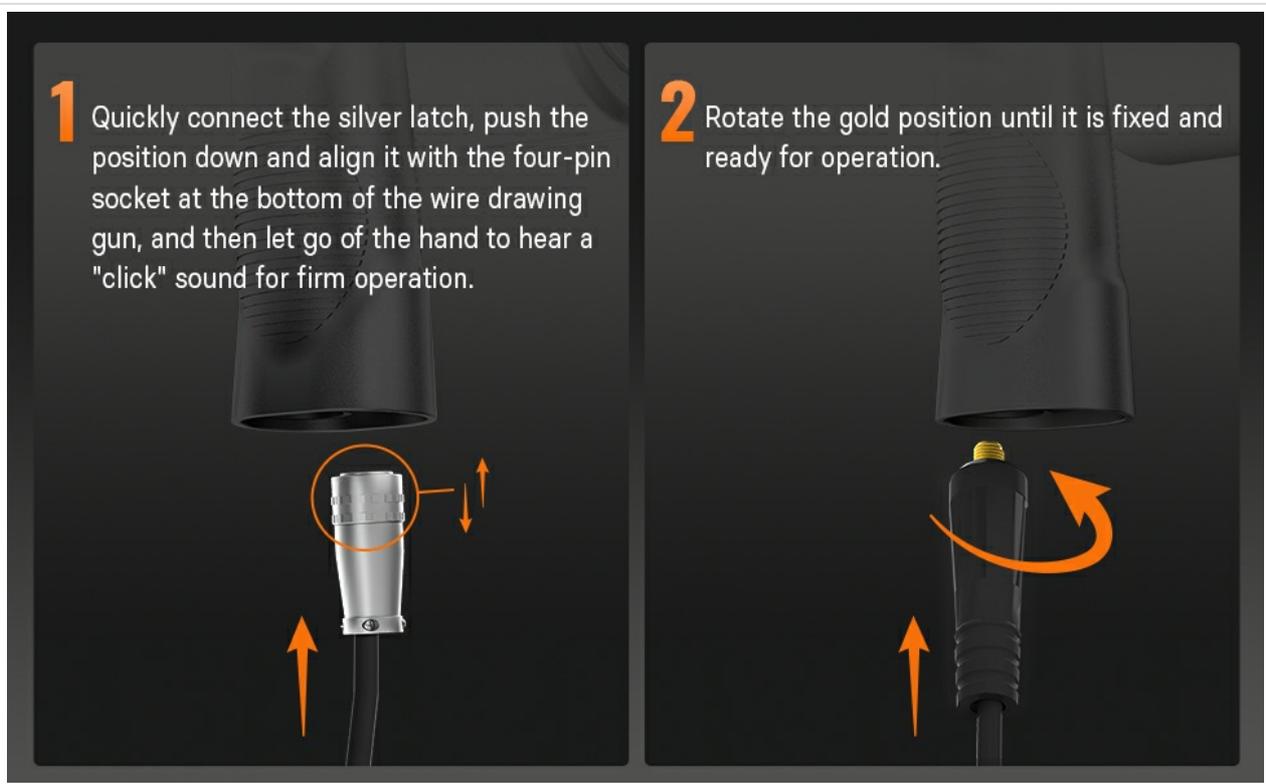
Step-by-step guide for securing the spool gun connections to the welder.
